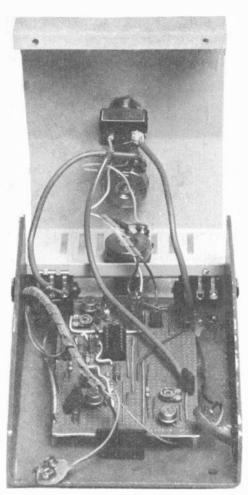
(below) show the layout of the components on the topside of the board and the breaks to be made on the underside; (top right) complete wiring between board and case mounted components; (above) prototype circuit board.
